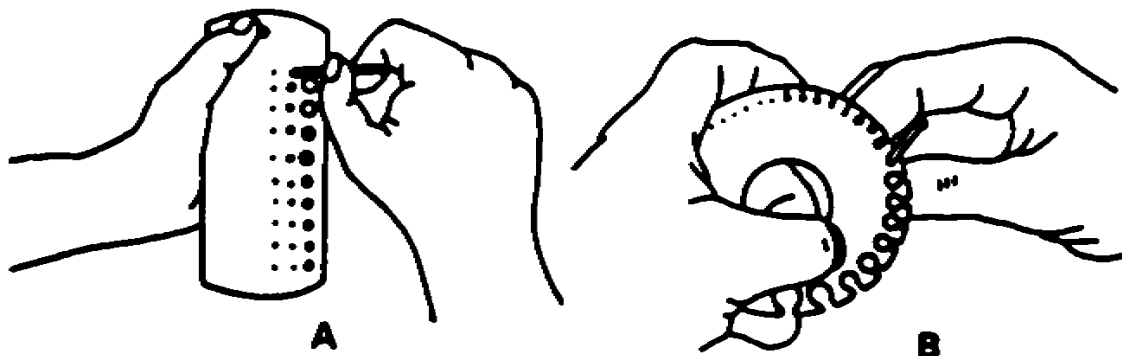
USING DRILL AND WIRE GAGES (PARTS A AND B)
